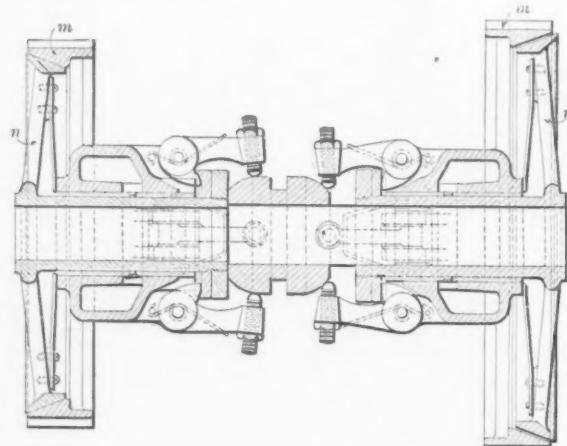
Section of the Friction Gears for Changing the Cutting Speed.
